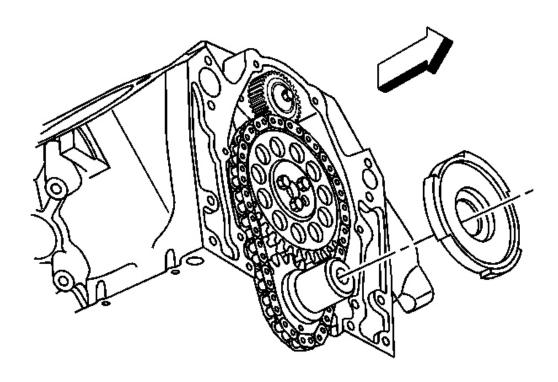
CKP Sensor Reluctor Ring Courtesy of GENERAL MOTORS CORP.
